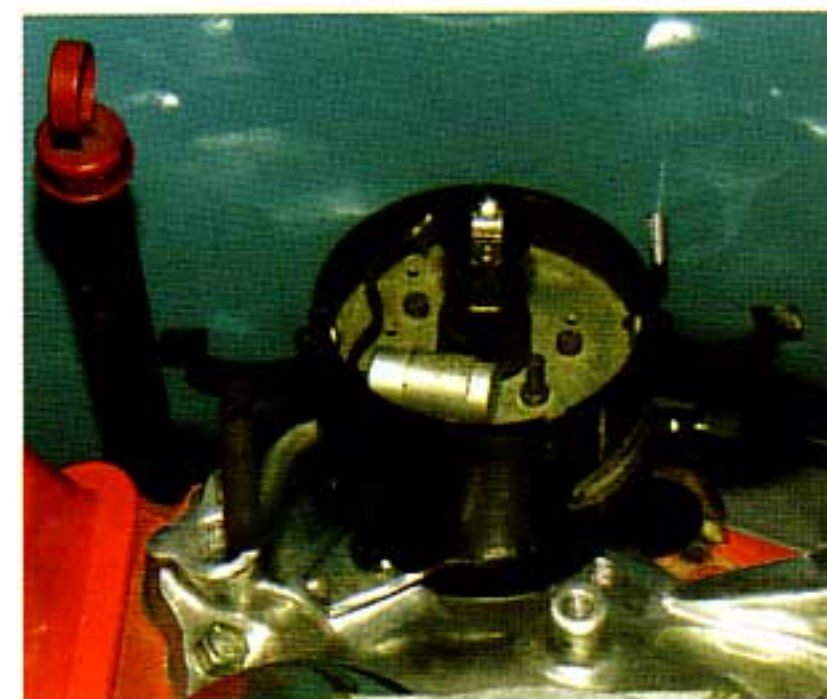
Before removing the distributor, rotate the engine with the starter until the ignition rotor is facing directly forward. This is how you will orient the new distributor when installing it.
